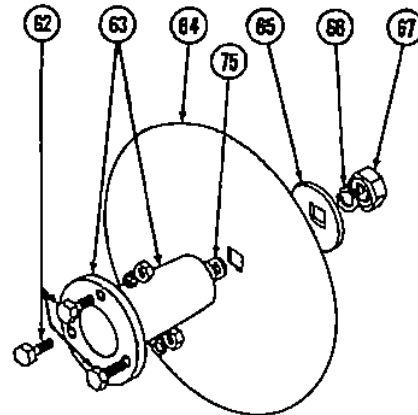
FURROW FILLER ATTACHMENT — MACH. NO. 200080
